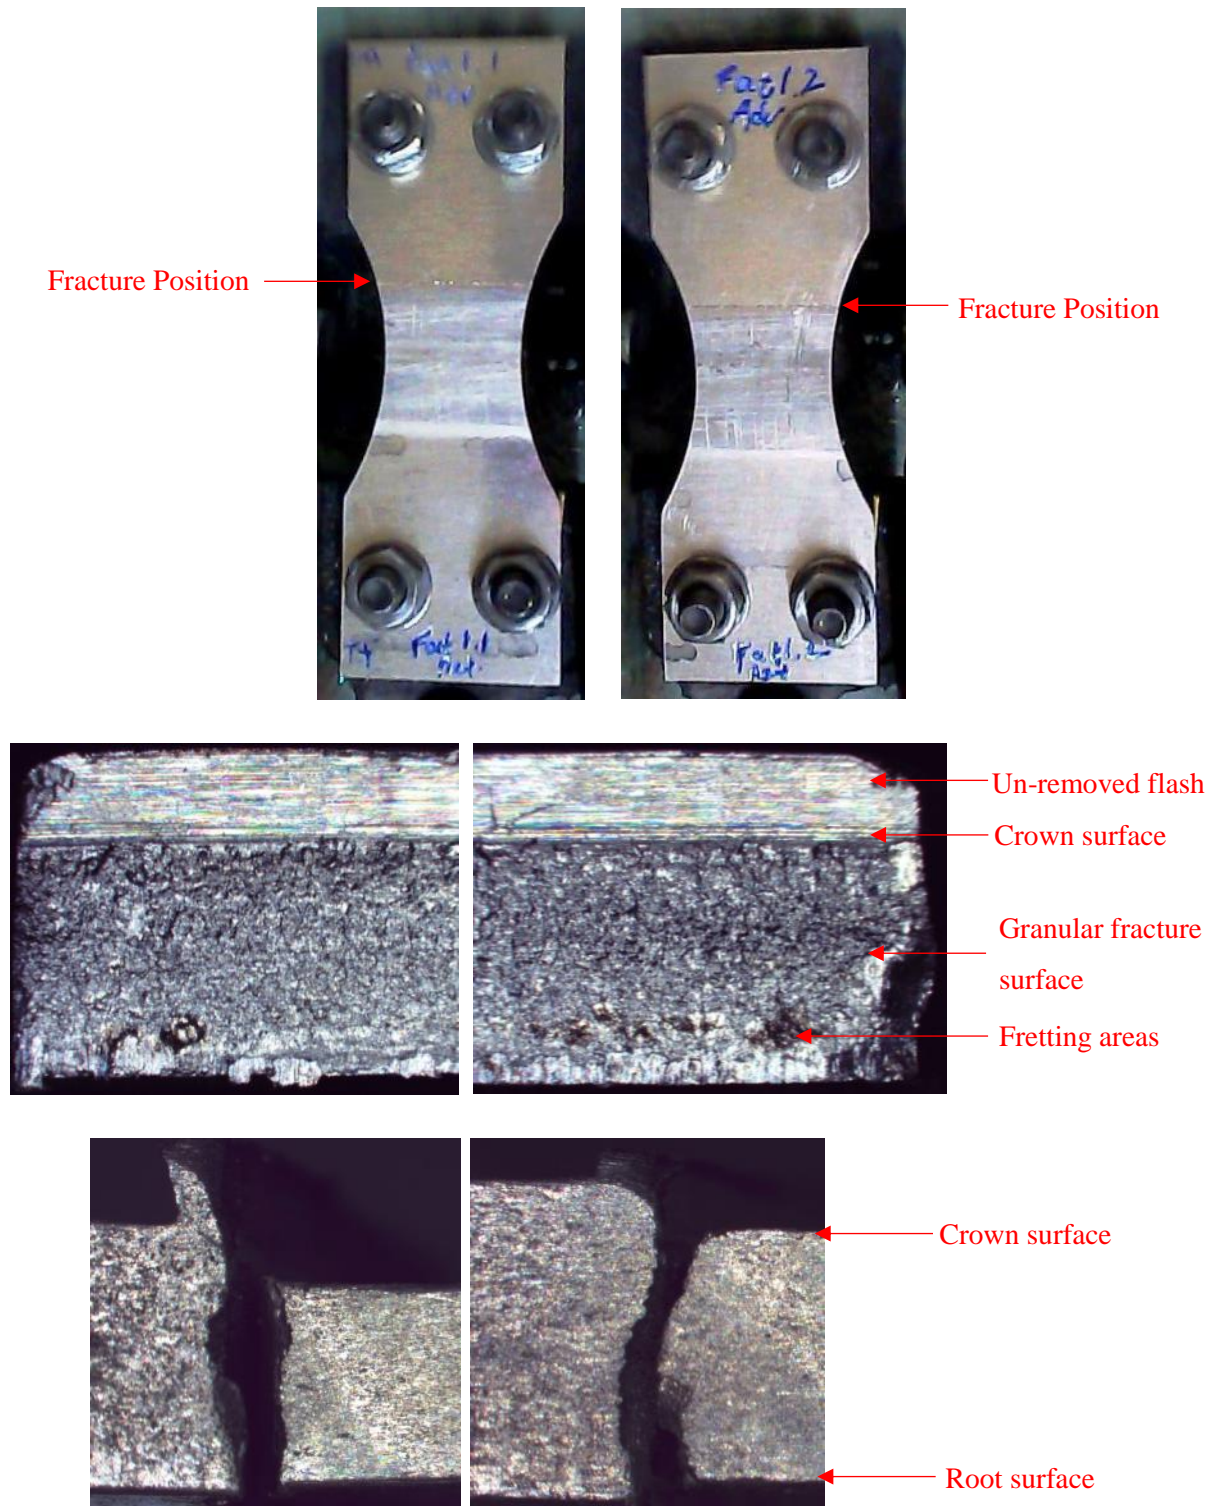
Fracture Position of the Un-skimmed Fatigue Samples
